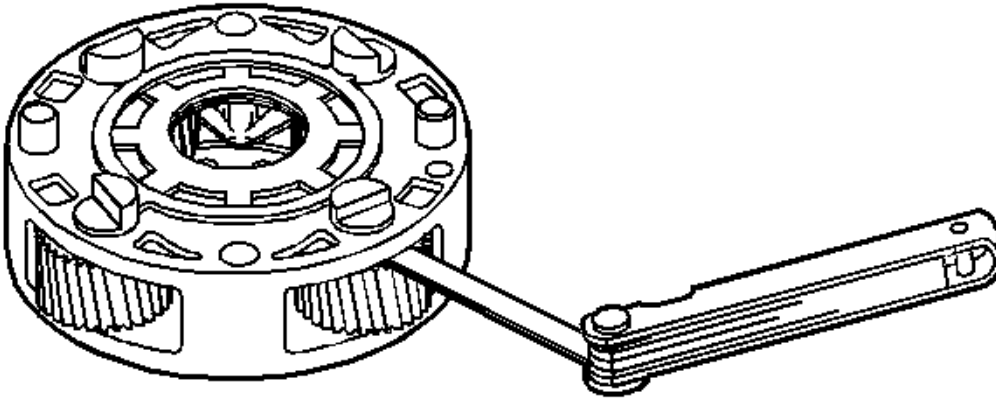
Checking Final Drive Planet Pinion To Carrier Clearance
